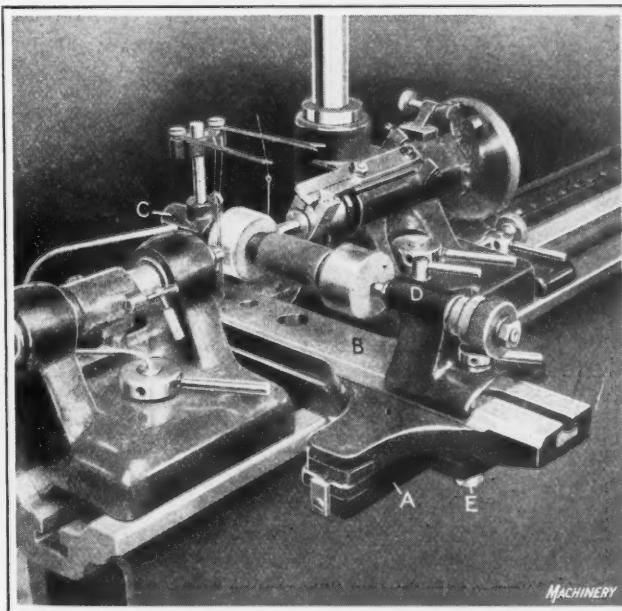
Attachment developed to facilitate the measuring of Thread Plug Gages held between Centers
